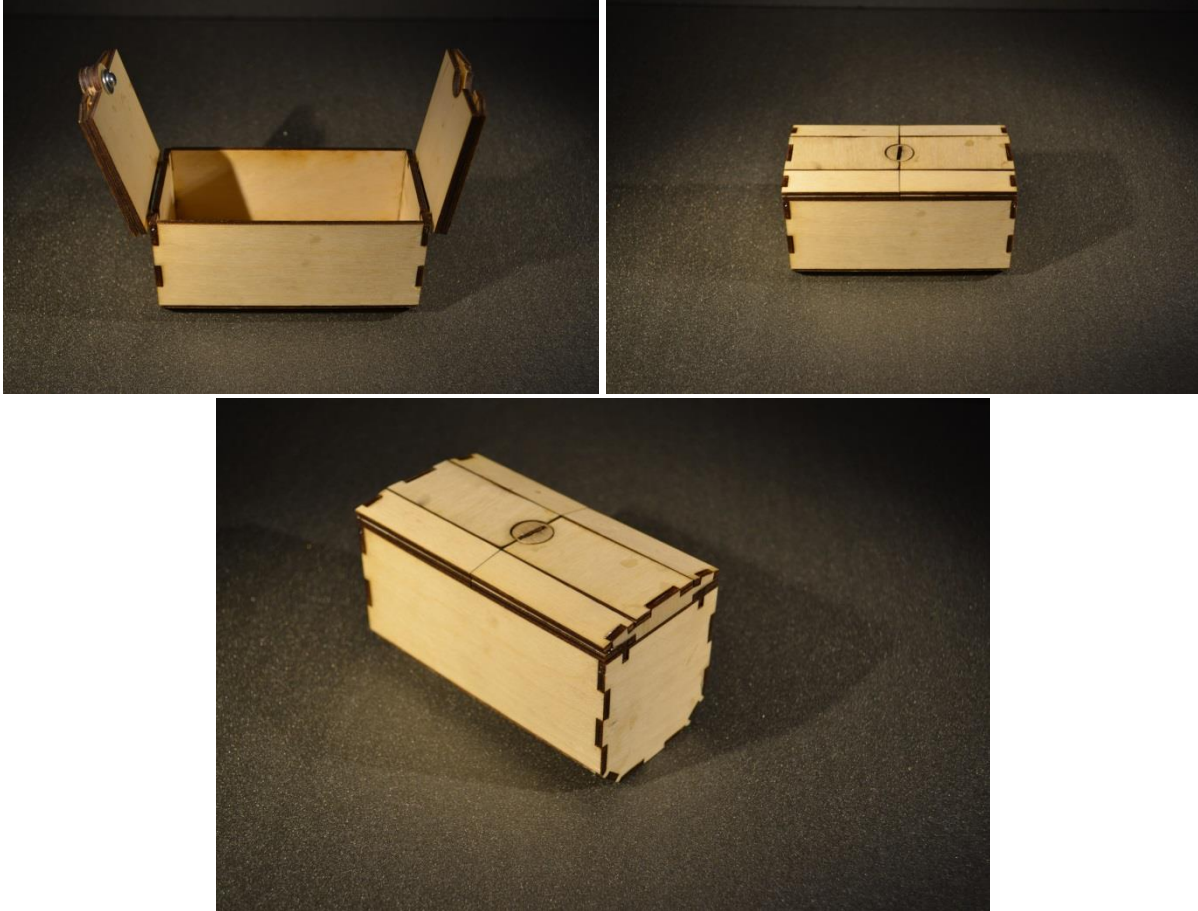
Open view of box sub assembly (top left), closed view (top right), and isometric view (bottom center)
